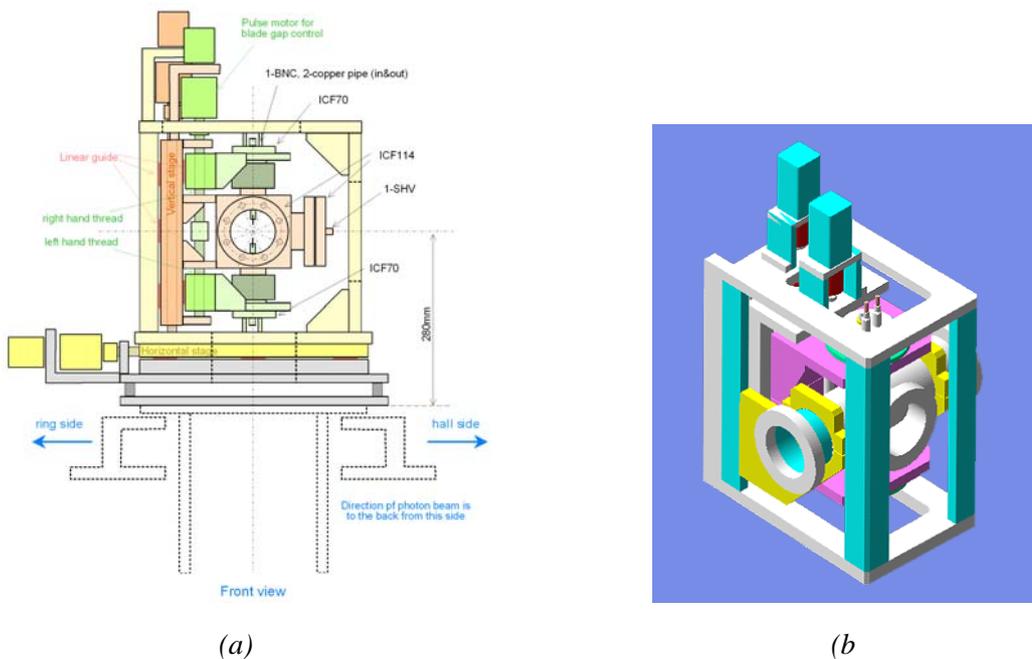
(a) Schematic view (front view) of a vertical-blade-drive style XBPM, and (b) the 3D picture.
